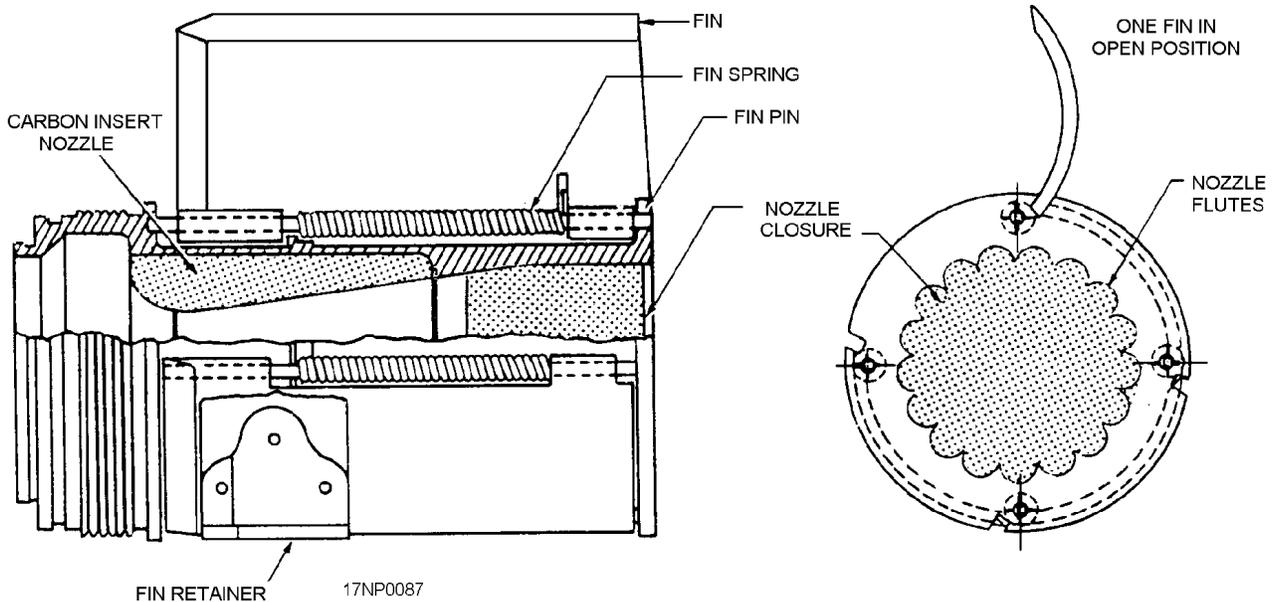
Mk 71 Mods motor, nozzle, and fin assembly.
